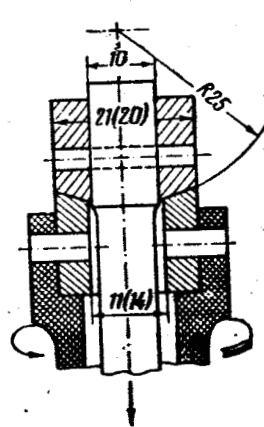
Diagram of the Friction-Testing Setup and Principal Dimensions of the Specimens.
